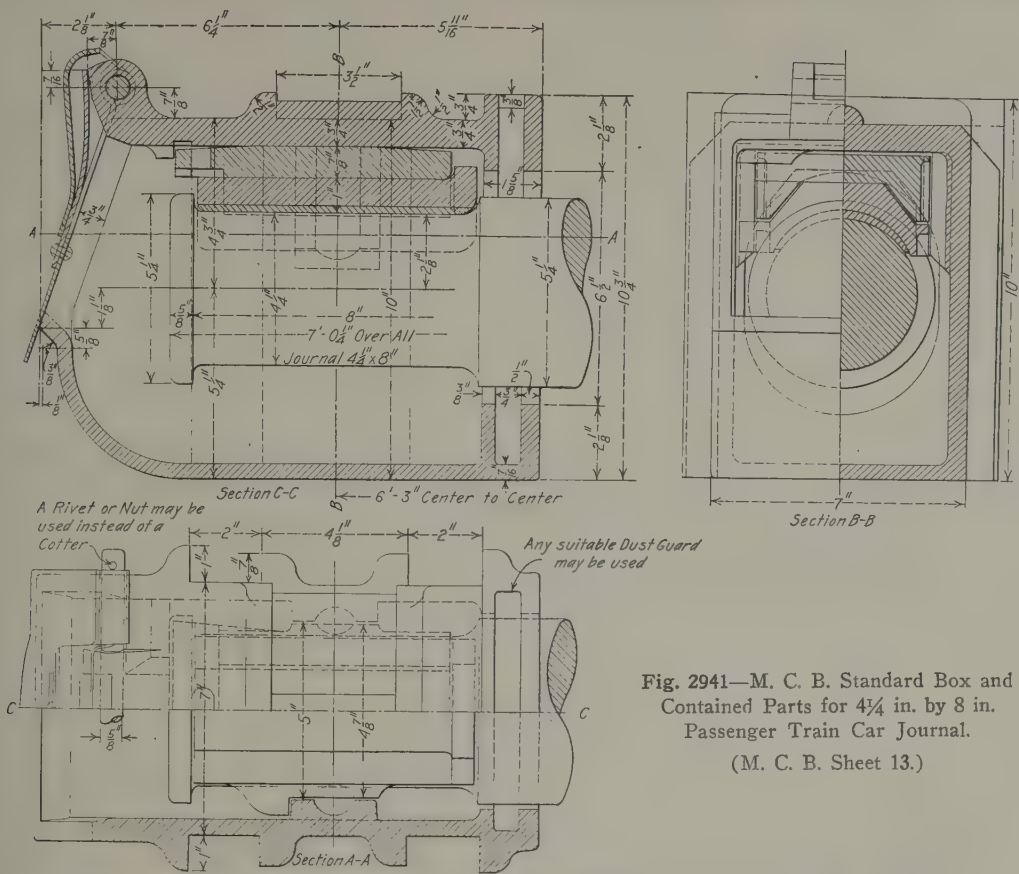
M. C. B. Standard Box and Contained Parts for 4 1/4 in. by 8 in. Passenger Train Car Journal. (M. C. B. Sheet 13.)
